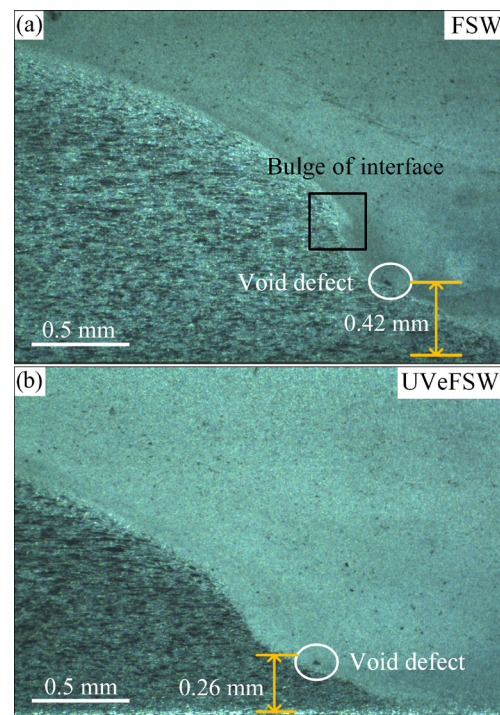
Local morphologies of 2195-T6 joints obtained at welding speed of 570 mm/min: (a) FSW; (b) UVeFSW
